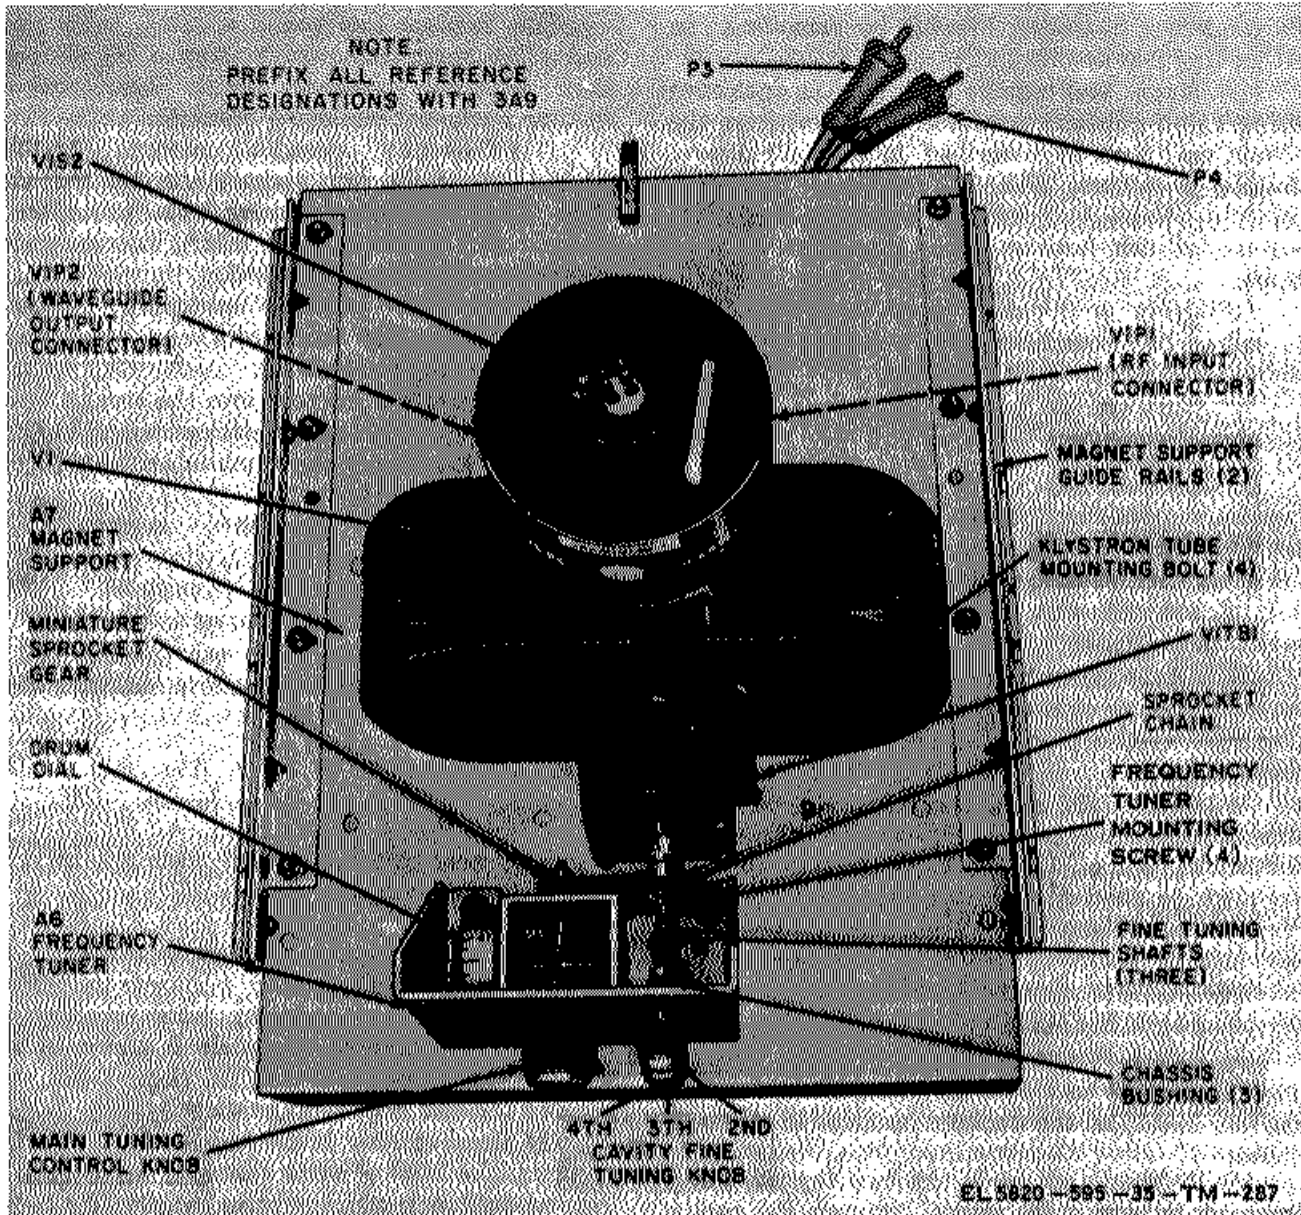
Magnet support 3A9A7, top view, parts location.
